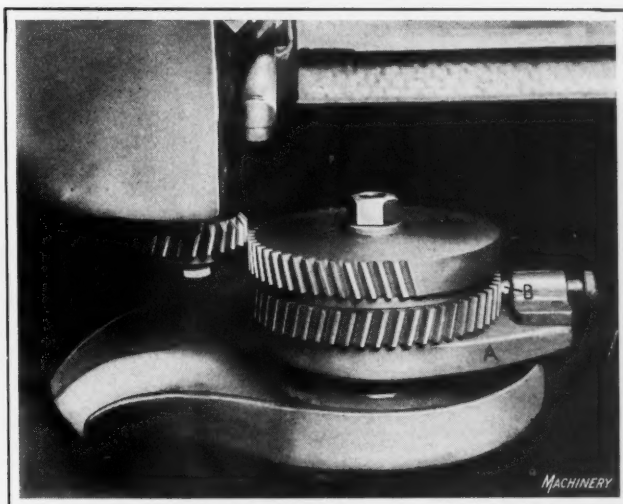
Locating Fixture used in cutting Second Half of Herringbone Gear
